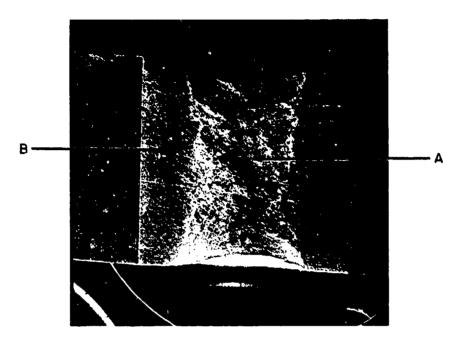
Fatigue fracture surface of an A-514 steel plate specimen, 10x.
